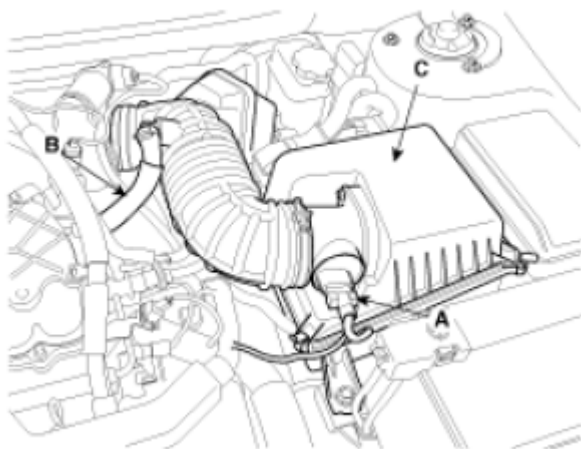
Identifying MAF Connector, Breather Hose And Air Cleaner Assembly
